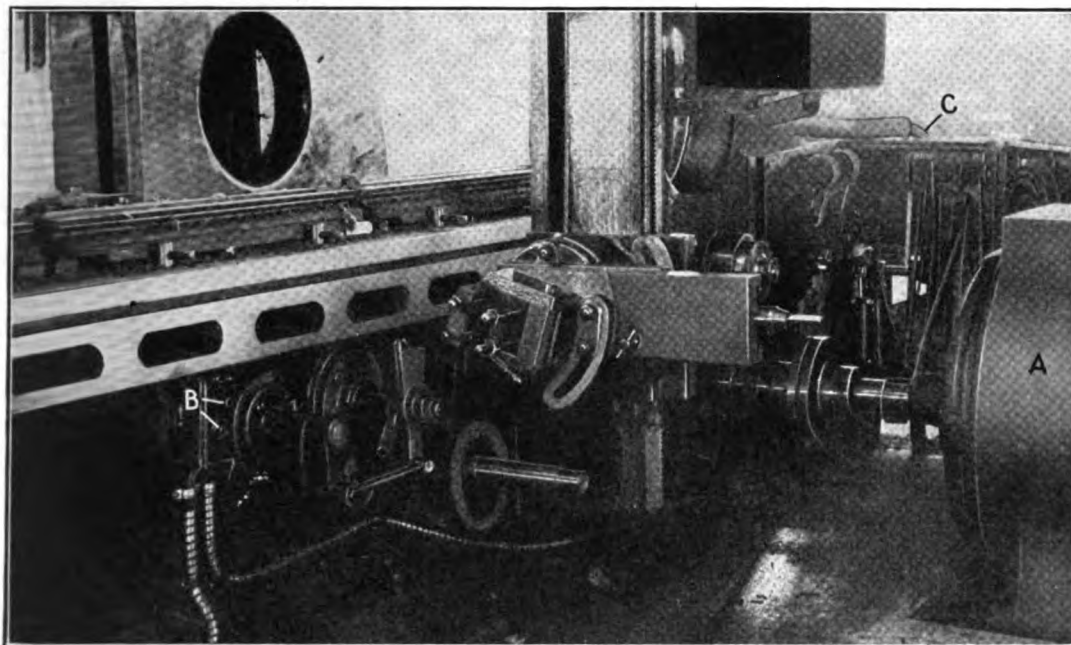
GENERAL VIEW OF PLANER CONTROLLER APPARATUS
